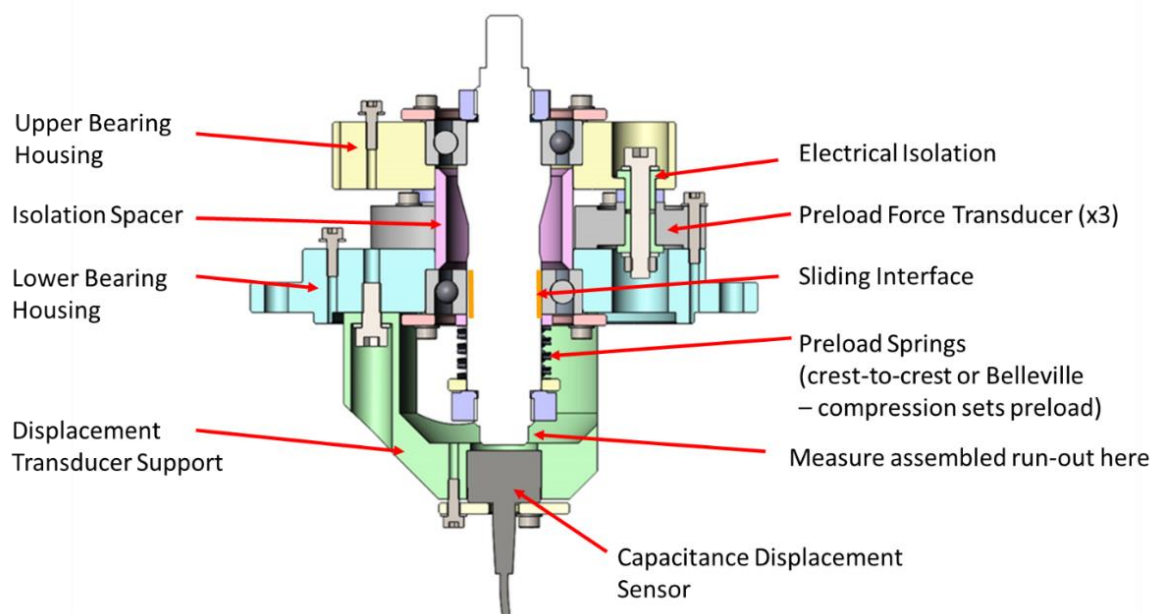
Detailed cross-section of the ABTR bearing assembly.
